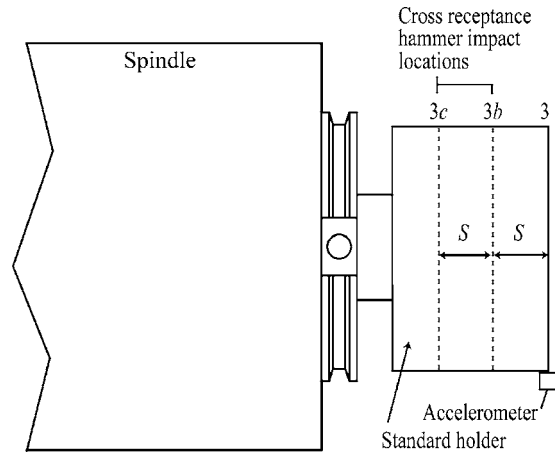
Example standard holder for spindle-holder base sub-assembly receptance identification (dimensions provided in Table 1). Hammer impacts are completed at locations 3c, 3b, and 3 to identify the required direct and cross receptances
